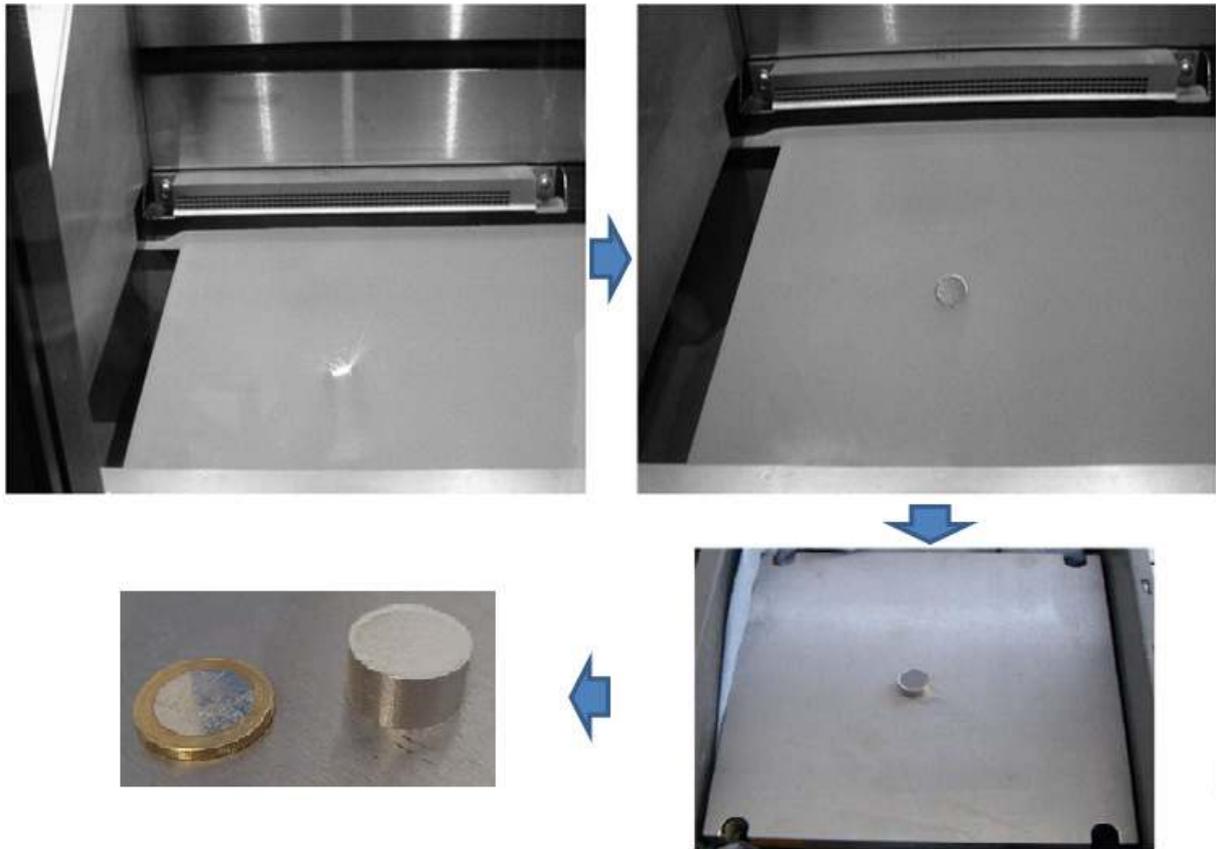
Illustration of the welding process and the build-up of the cylindrical specimen.
